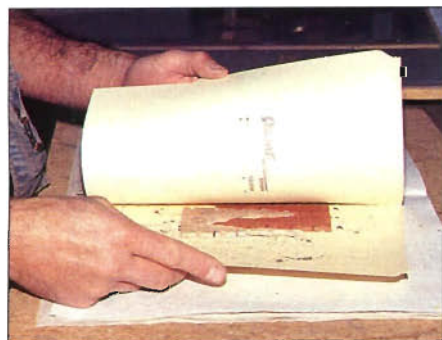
Photo I: For convenient handling of puzzle layers during finishing, use a manila folder to move and flip assembled pieces.
